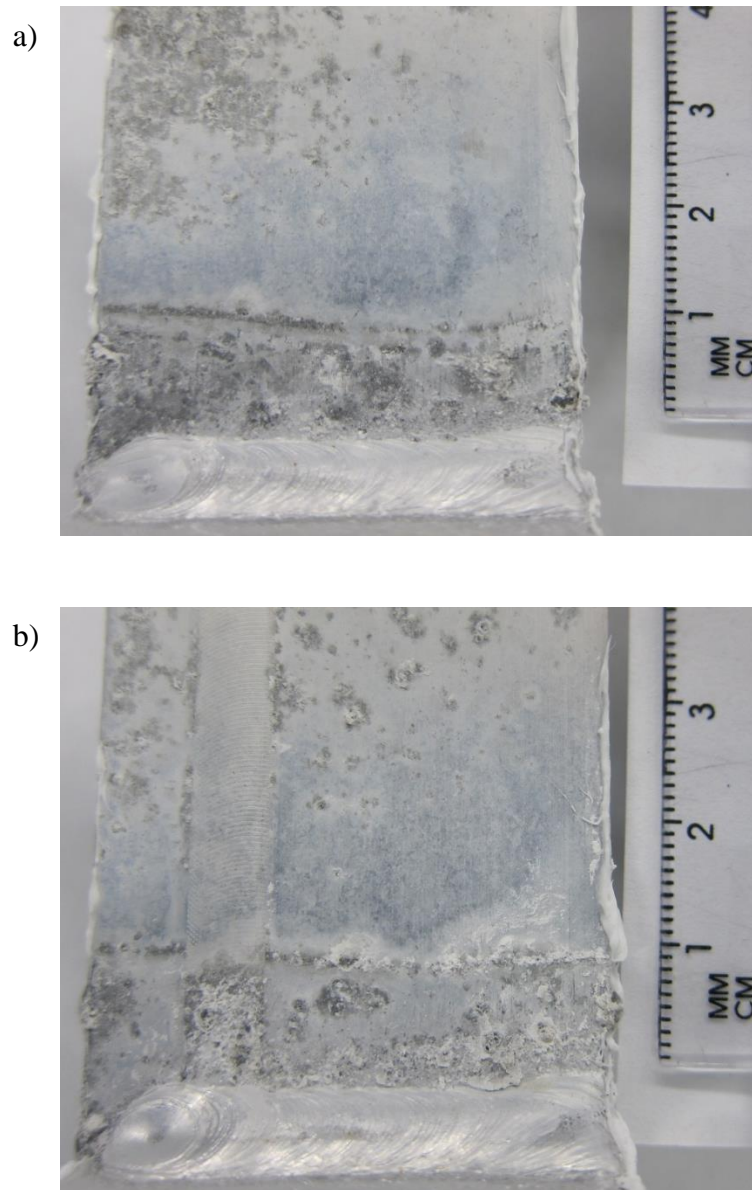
Close-up images of duplicate samples of T-joint welded configuration F1 (ER5356/AA7108/L) in the as-welded T6 condition.
